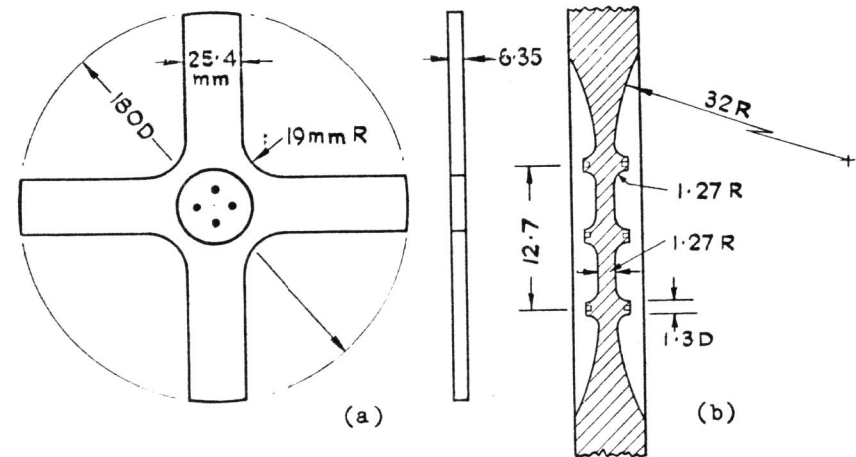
(a) View of complete specimen. (b) Cross-section of central region - full size. Dimensions in mm.
